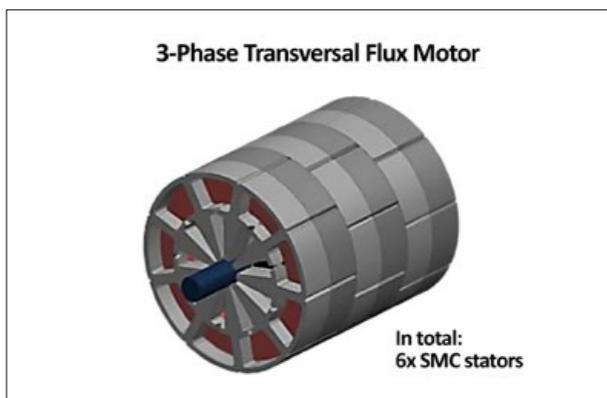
Assembly of a 3-phase Elektra transversal flux motor using six SMC stators [1] (Courtesy GKN Sinter Metals)
